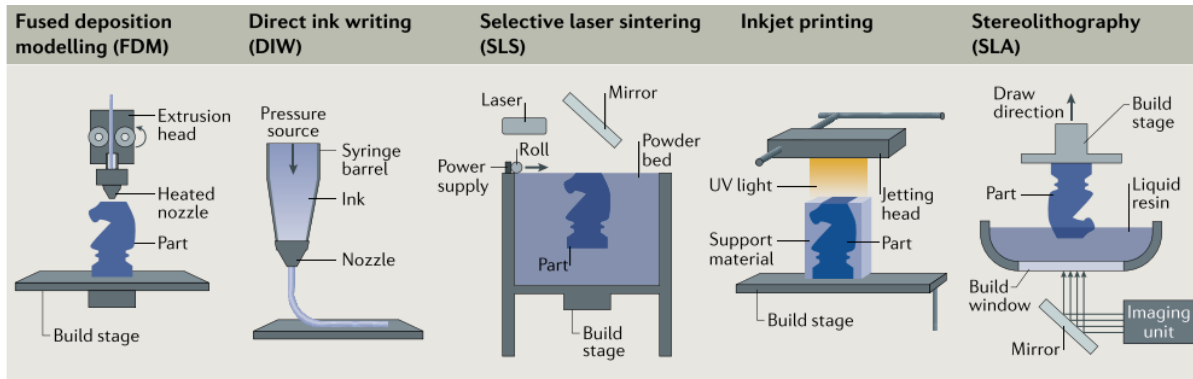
Summary of the additive manufacturing techniques for soft robotic designs. Adapted from [2].
